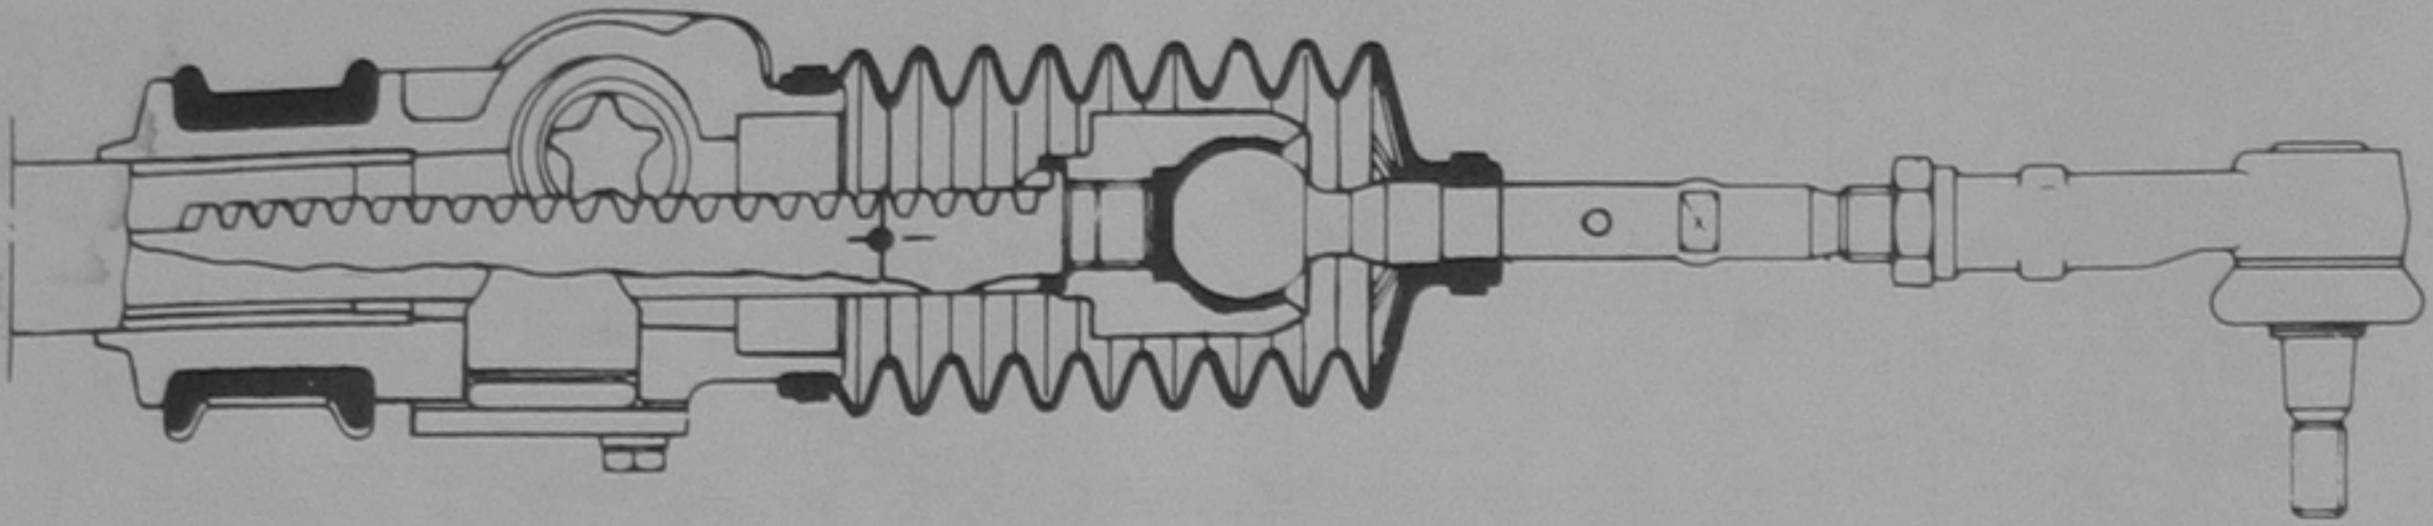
Cut-away view of one side of the steering rack (Sec 11)
